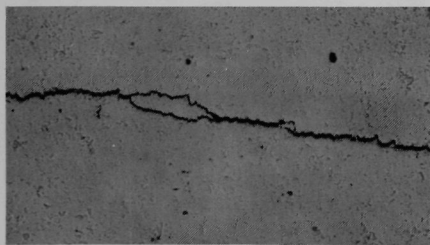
Longitudinal View of Axial Crack in Cylinder of Lead-cutting Tool (as polished). Mag. 75X.
